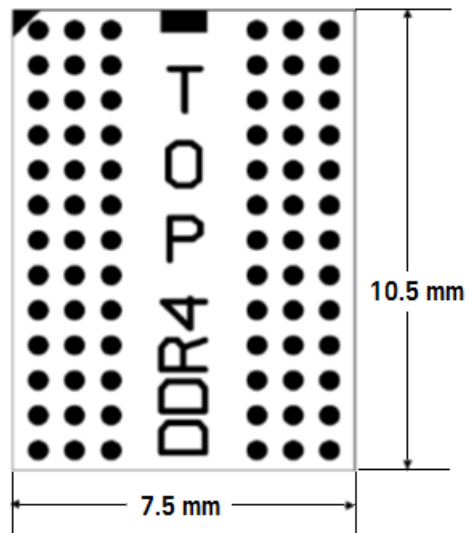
Dimensions of a W4643A interposer (TOP VIEW)
